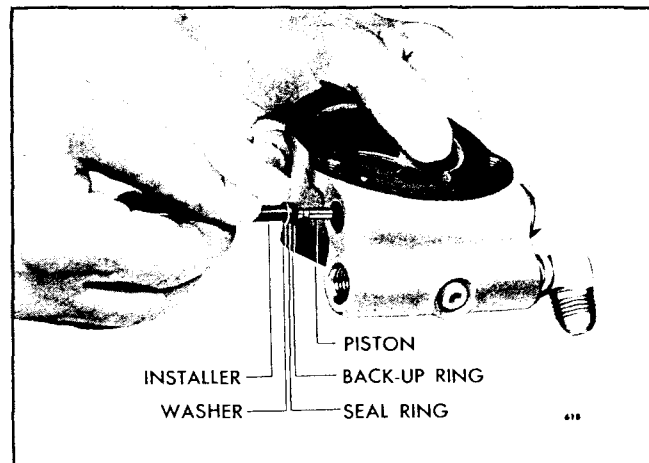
Installing Pressure Relief Piston, Back-Up Ring, Seal Ring and Washer in Pump Body with Installer J 7192
